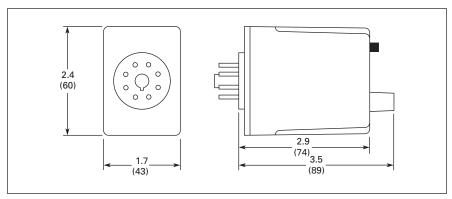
D65PAR Series — Approximate Dimensions in Inches (mm)
